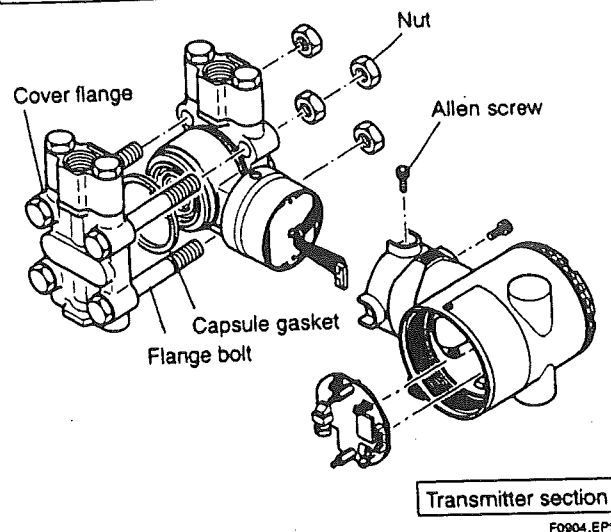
Removing and Mounting the Pressure-detector Section
